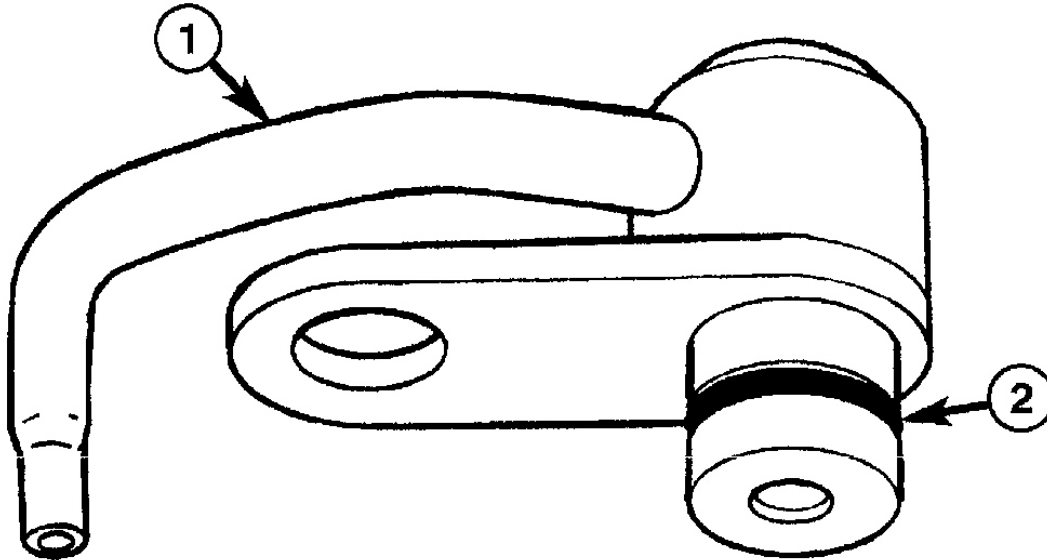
Removing & Installing Oil Jet Fasteners - Turbo
